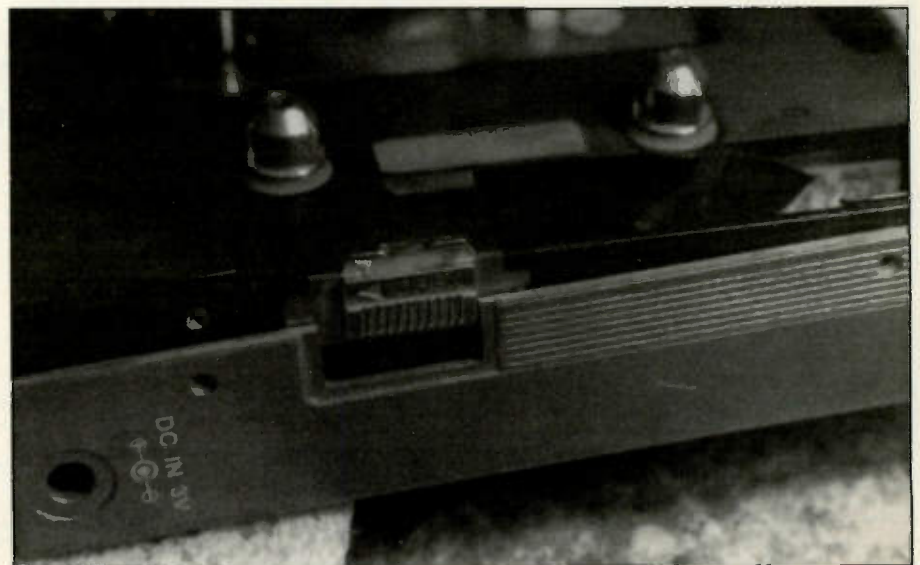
This latch is held in place by the outer cover (which is partially removed). It has a spring behind it, and will pop off if not held in place.
